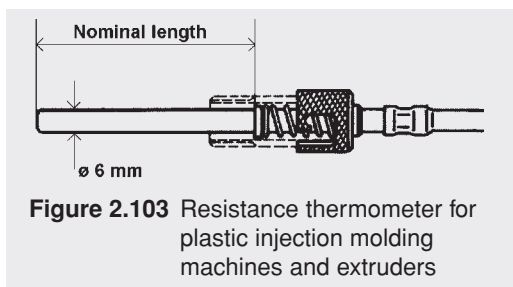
Resistance thermometer for plastic injection molding machines and extruders
